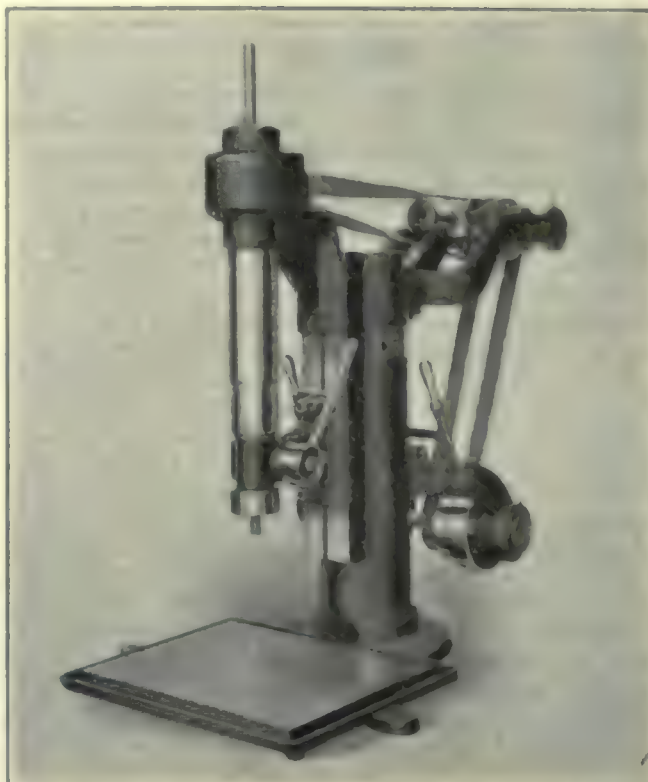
NO. 1 HIGH SPEED BENCH DRILLING MACHINE
